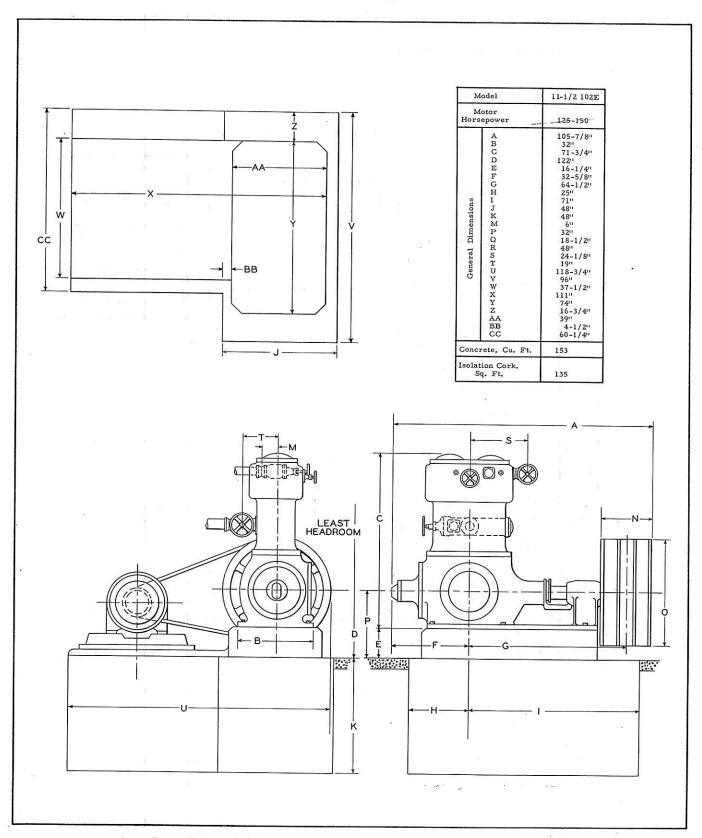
Dimensions, Belt Driven Compressor -  $11-1/2^{11} \times 10^{11}$
